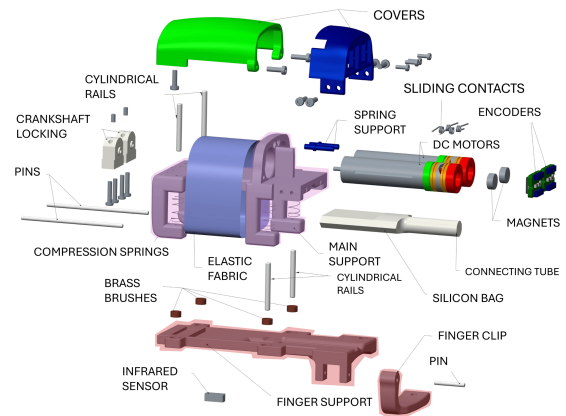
W-FYD AIR exploded view. Main and moving frames are highlighted in pink and red, respectively.
